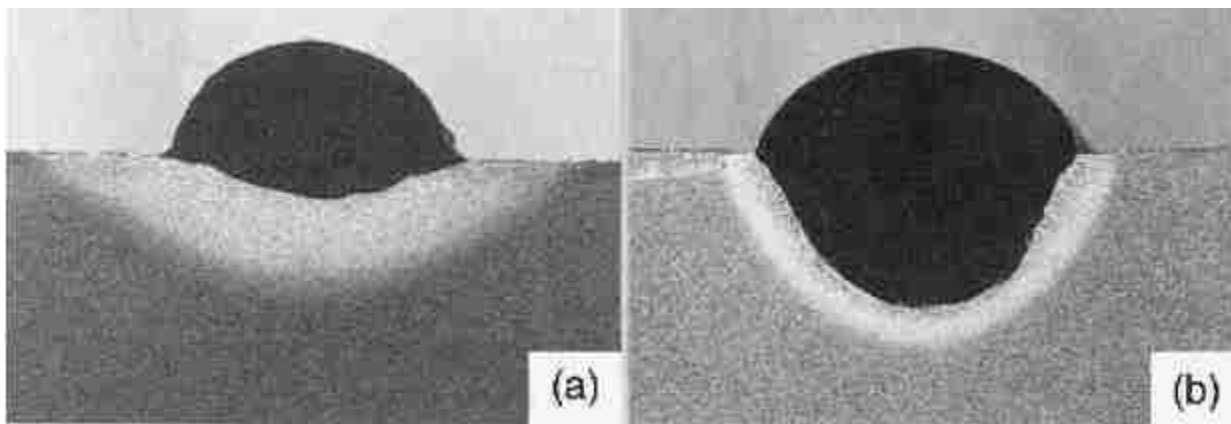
Melting efficiency: (a) lower at lower heat input and welding speed; (b) higher at higher heat input and welding speed [14]
